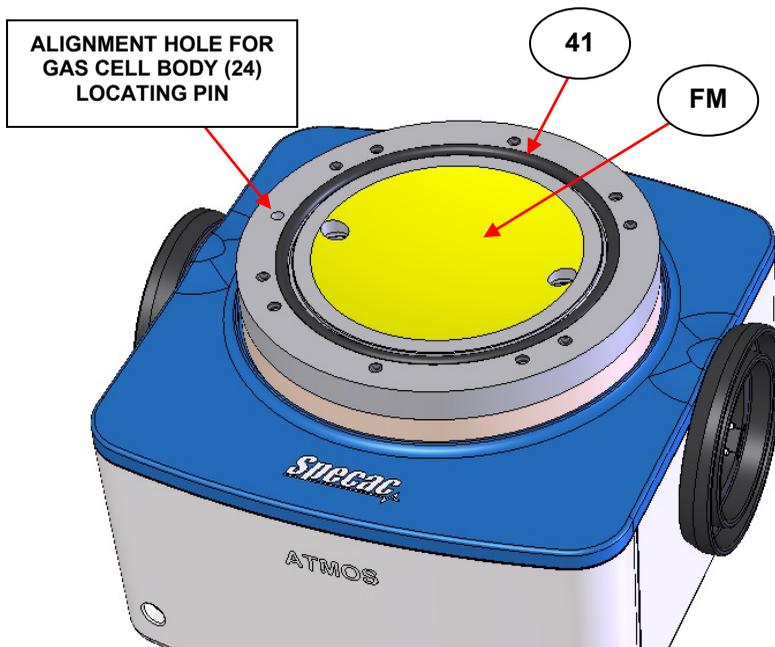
PEEK Support Ring (30) Removal from A2.5 Atmos Gas Cell Body Assembly (28)
